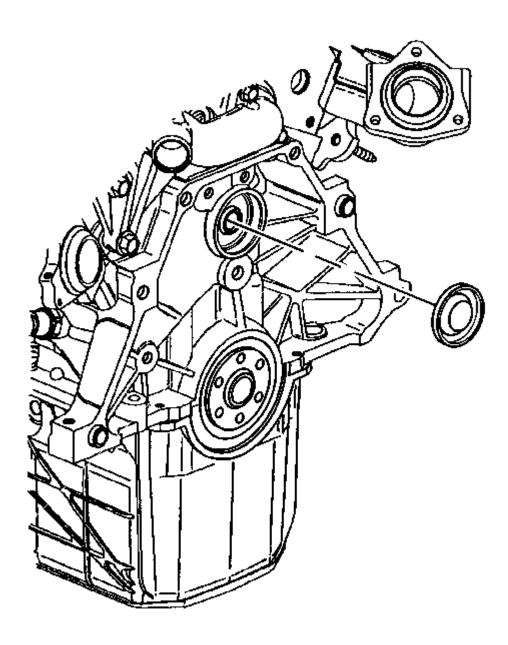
View Of Camshaft Rear Bearing Hole Plug Courtesy of GENERAL MOTORS CORP.
